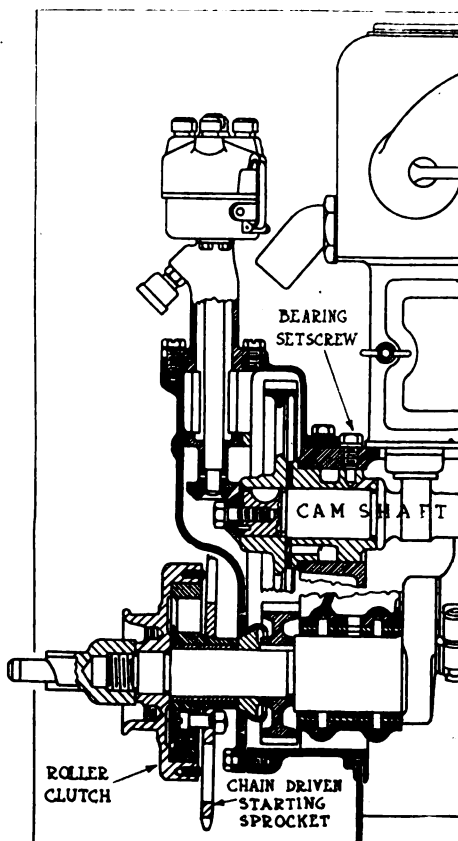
Before the camshaft can be withdrawn the generator, distributor, starting clutch and gearcase cover must be removed
